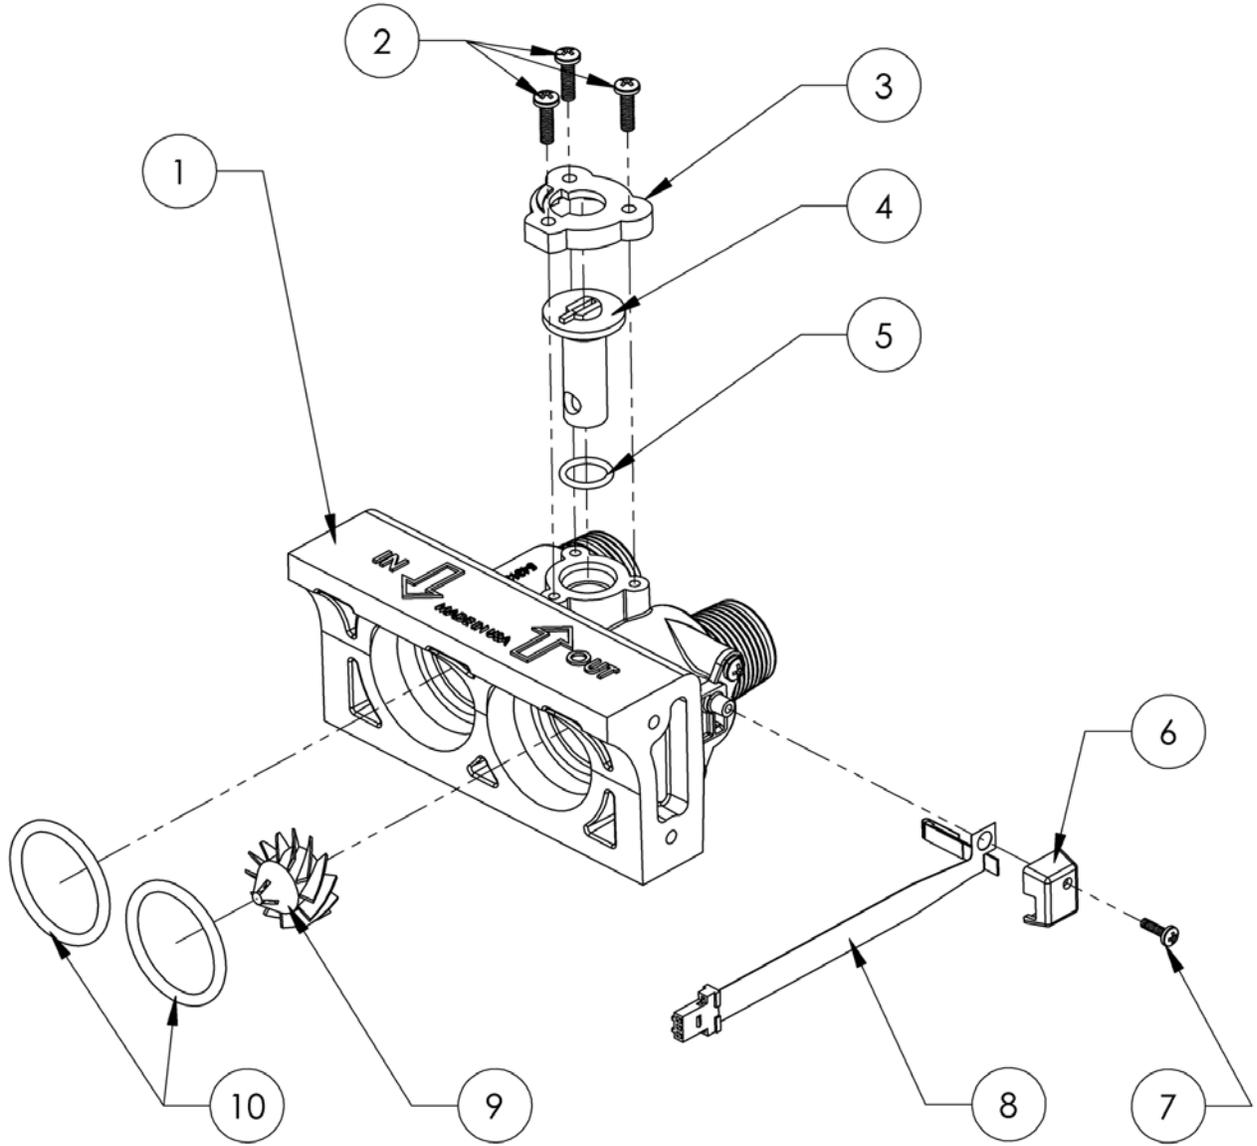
3/4" I/O Adapter Assembly with Blending Valve
